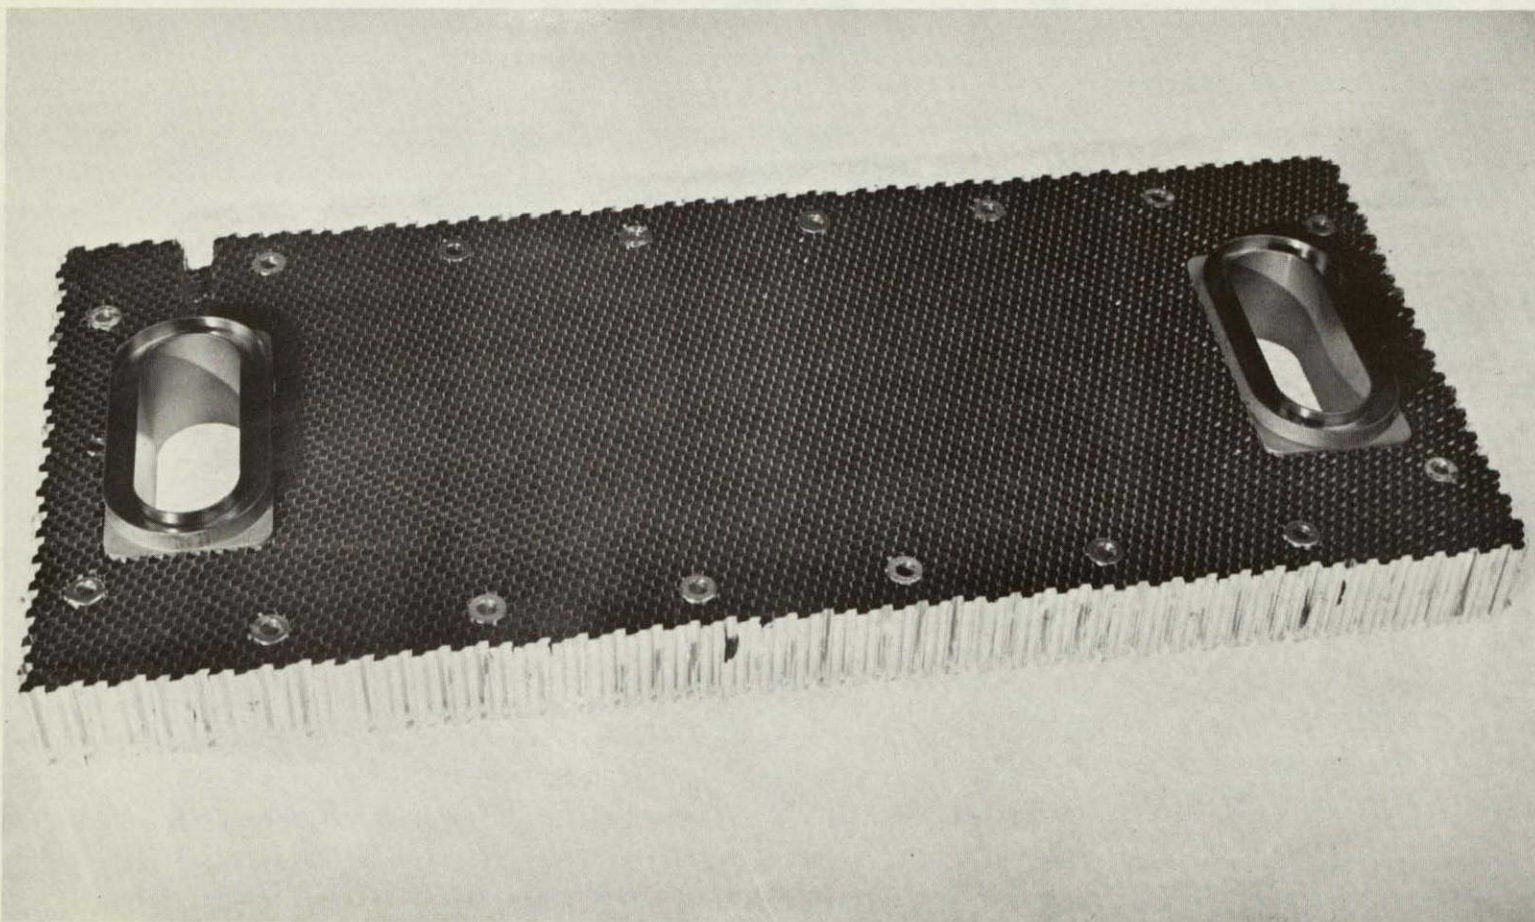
HONEYCOMB CORE ASSEMBLED AND READY FOR BONDING
